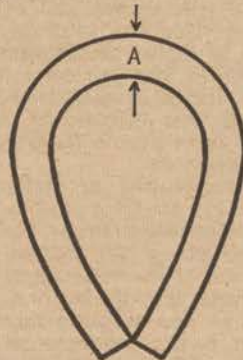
Bend Test of Vacuum Brake Hose.
